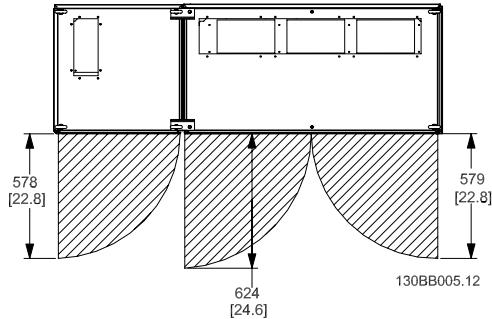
Space in front of IP21/IP54 enclosure type, frame size F2
